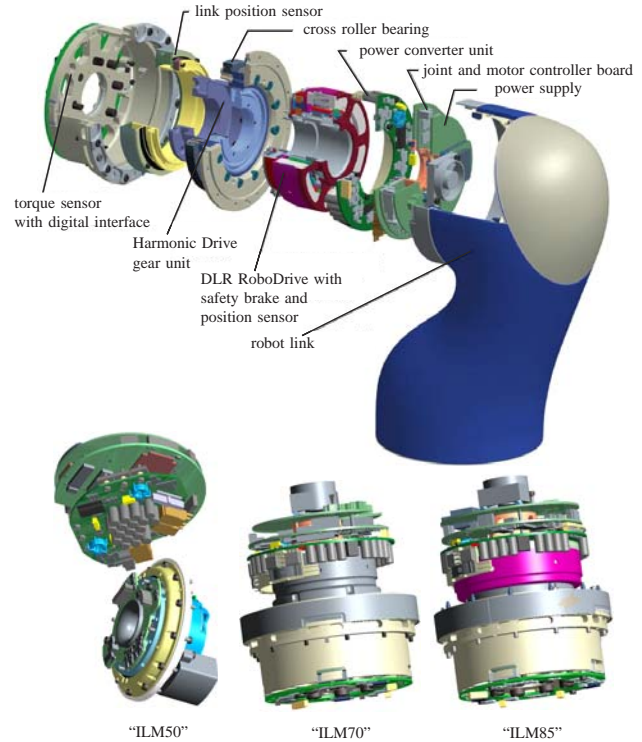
Light Weight Robot (LWR, [34]) drive unit assembly: top: exploded view; bottom: drive units integrated in TORO.
